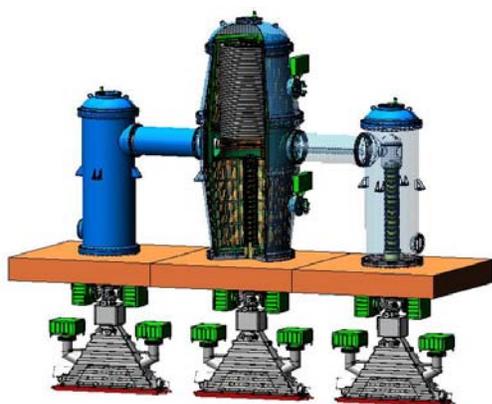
Accelerator of 1MeV, 400kW in assembly
